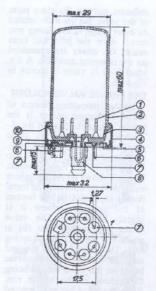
B-Technique style the contact pins and the guard plate; (8) guide pin with cam; (9) sealed-off pumping tube; and (10) fused joint between bulb and the pressed-glass base.
